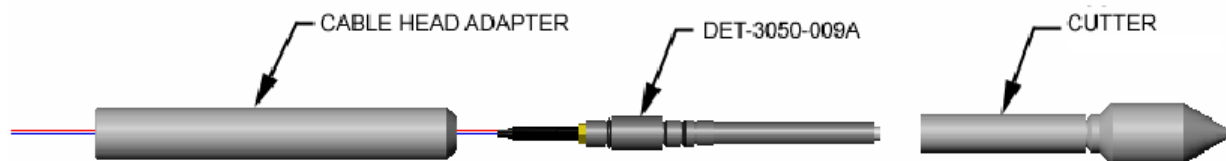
Arming Method for Coil Tubing Cutters - Exploded View
